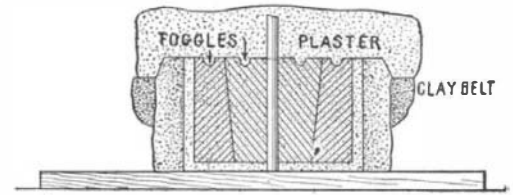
PARTS ASSEMBLED FOR CASTING PLASTER CASE.
